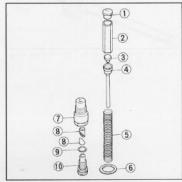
① Rubber tensioner ⑥ Sealing washer (14 mm)
